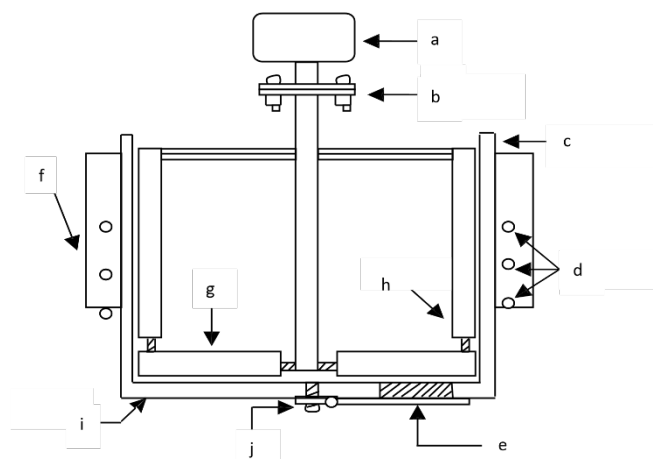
Schematic view of the mixer section. a - electric motor, b - rigid coupling, c - mixing vessel wall, d - heating coils, e - swing check valve, f - heating jacket, g - horizontal pitched blade, h - vertical pitched blade, i - H=115mm, Φ 235mm, j - holding screw
